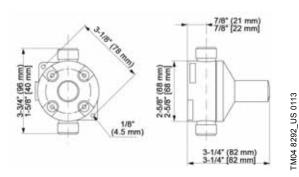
Pressure loading valve. Dimensions in brackets apply to stainless-steel version.
